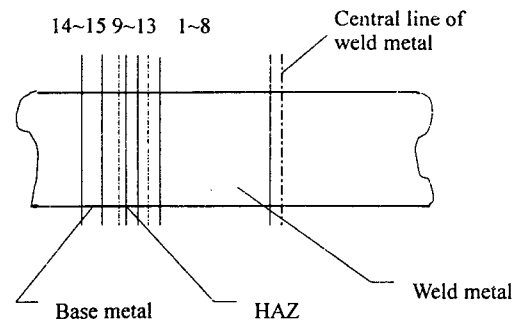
Schematic diagram showing the shape of 1Cr0.5Mo cross-weld specimen
